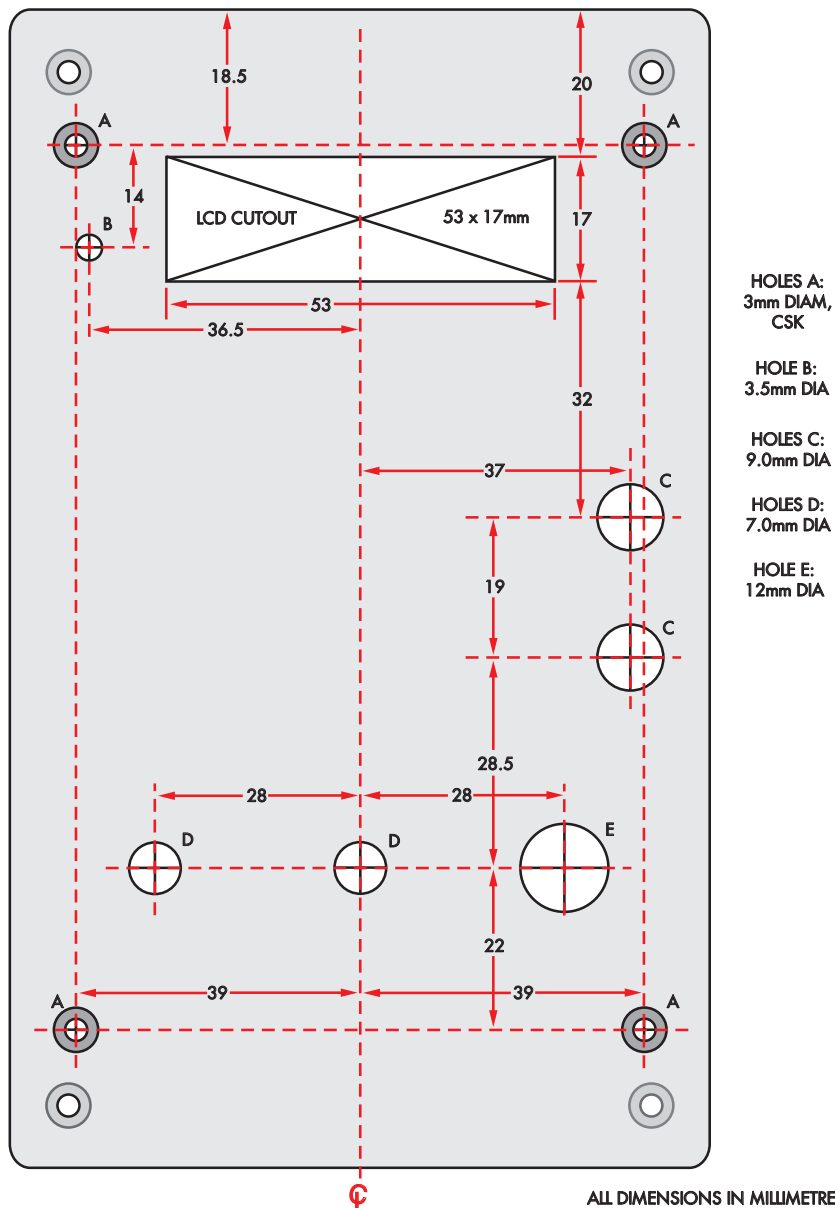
drilling and cutout detail for the lid of the UB1-size plastic box, from which hangs the PC board containing everything but the battery holder.
